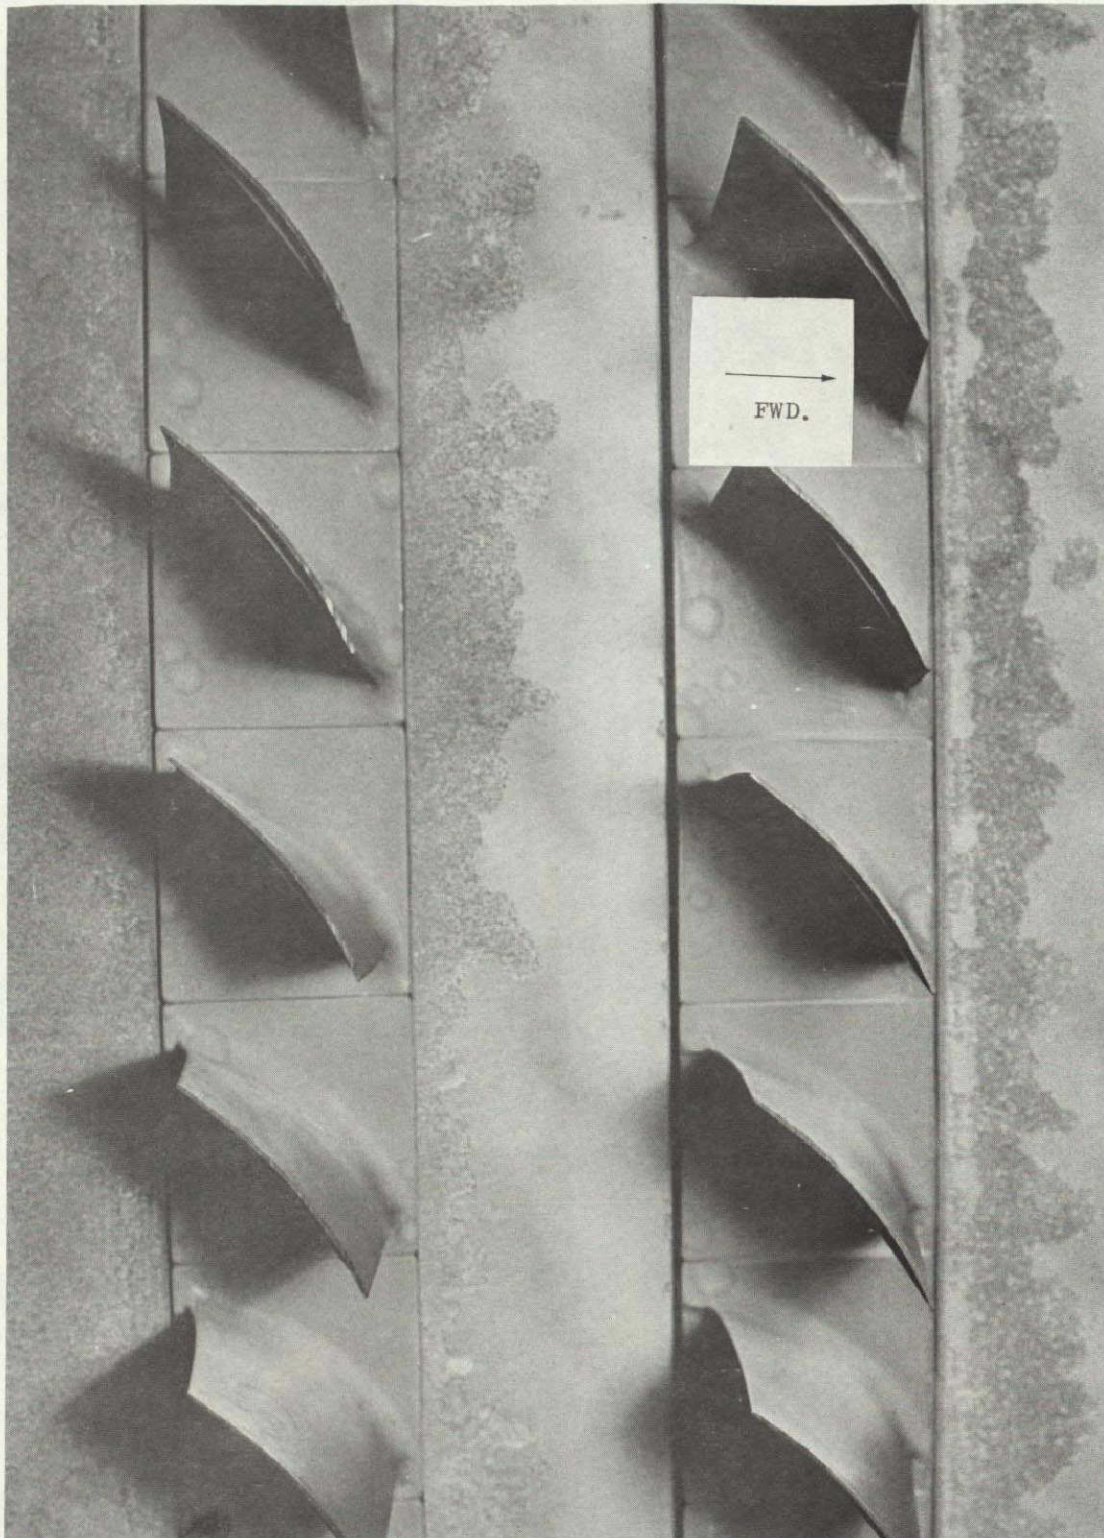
HP Compressor Rotor Stages 13 to 15 Land Coating.
